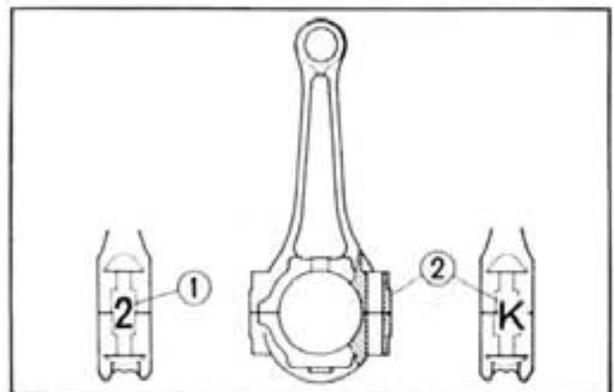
① Tolerance identification mark (Metal fit mark)
